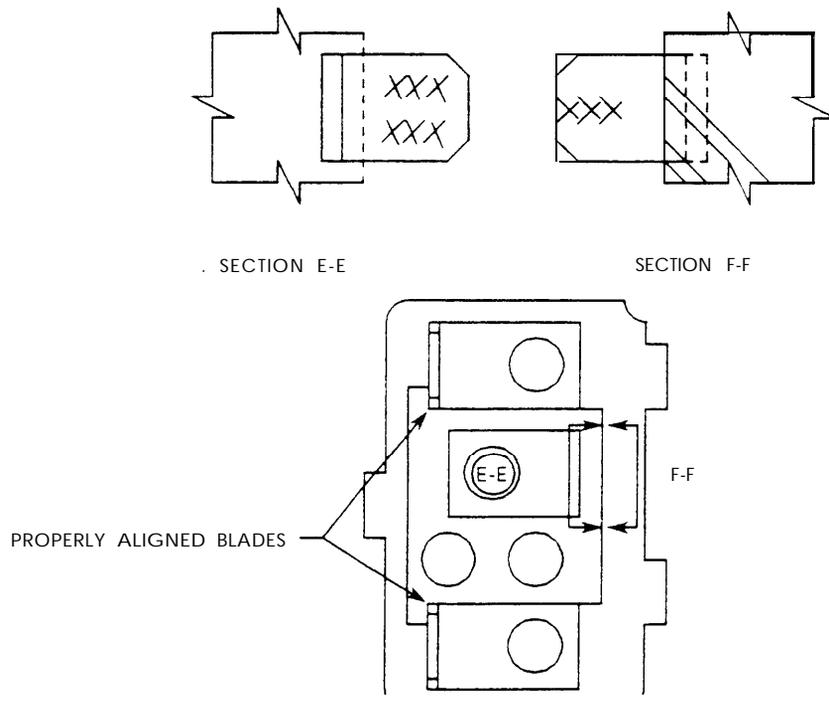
View of Pull-Out Showing Properly Aligned Blades.
